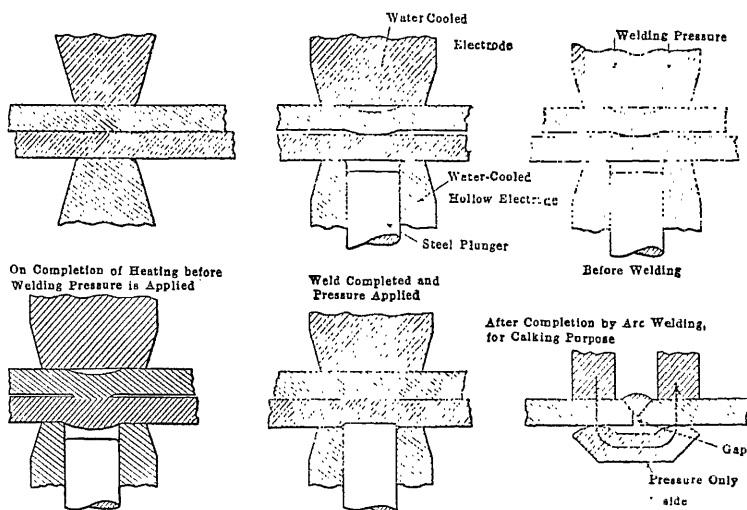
The Tit or Projection Method of Welding.
